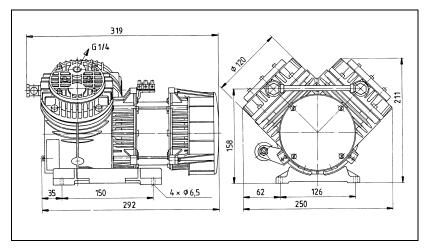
Mounting dimensions N 035.2 A\_E (IP20)
